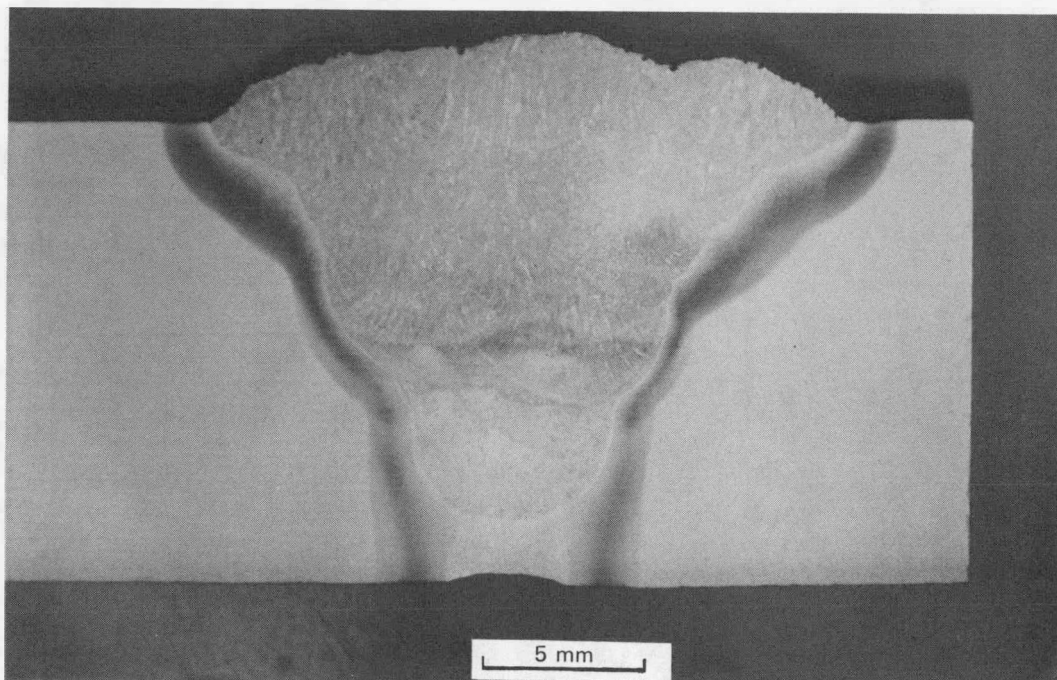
Cross-sectional view of shielded metal arc tube weld.
